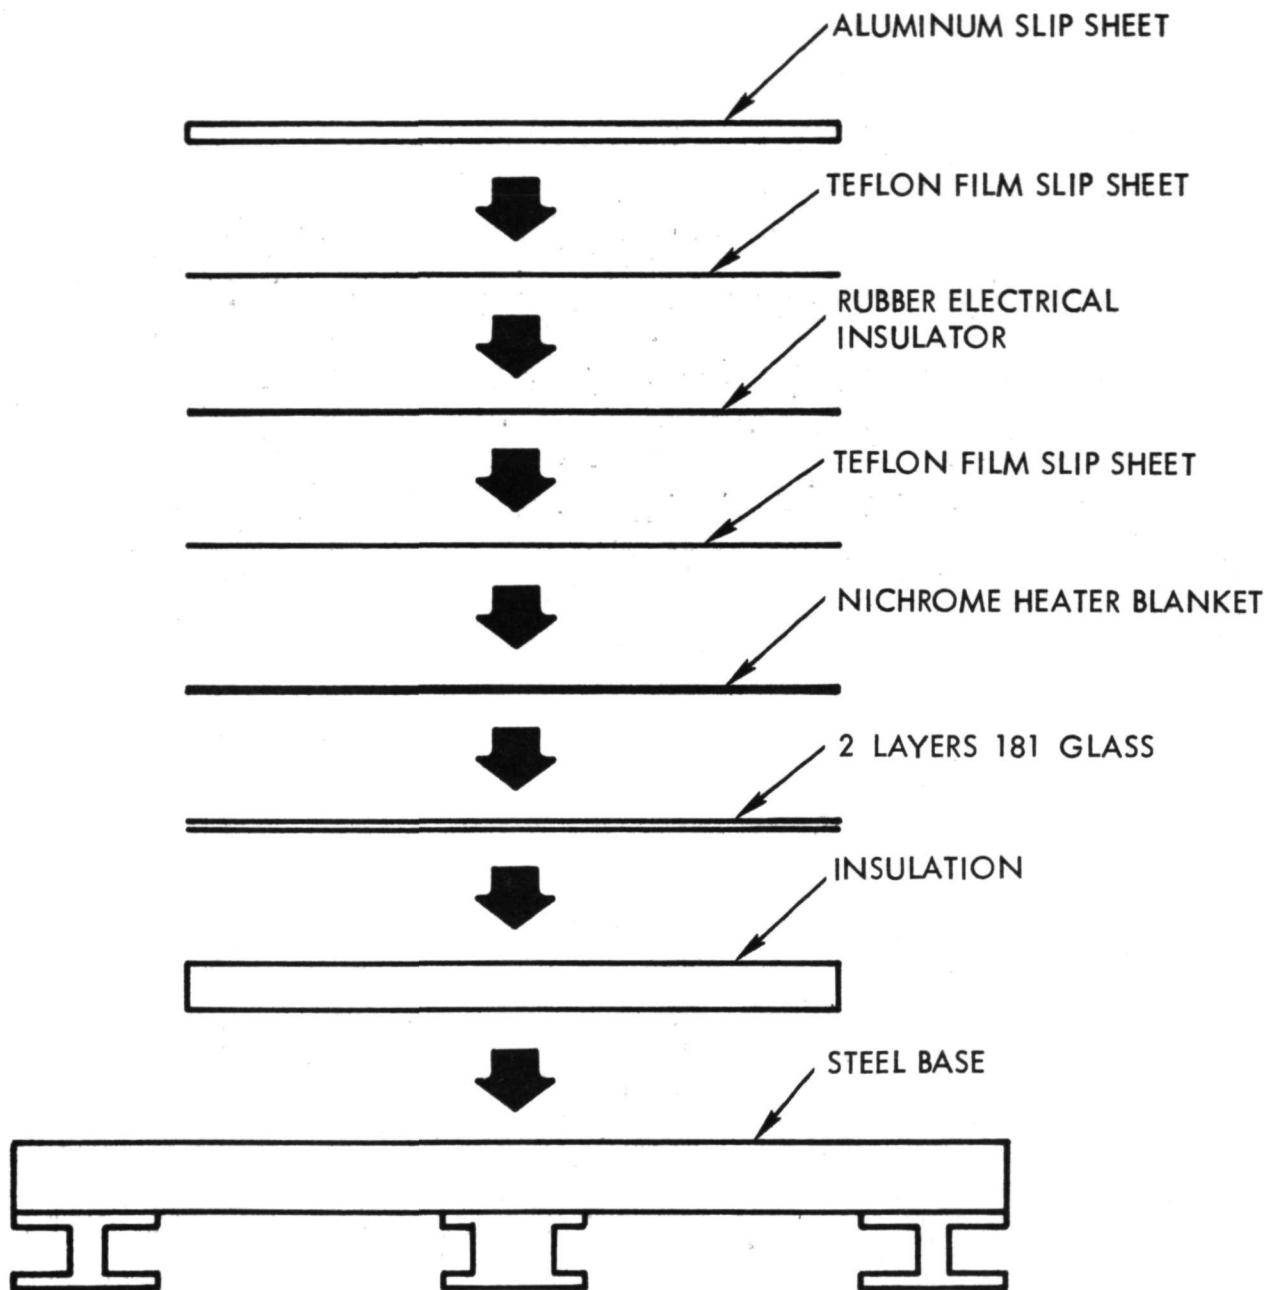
COOL TOOL (CROSS-SECTION SKETCH)
